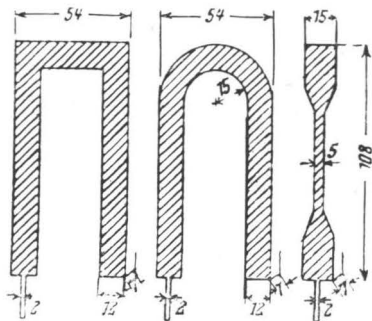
Shape of moulds used by Koster and Jöhring.
